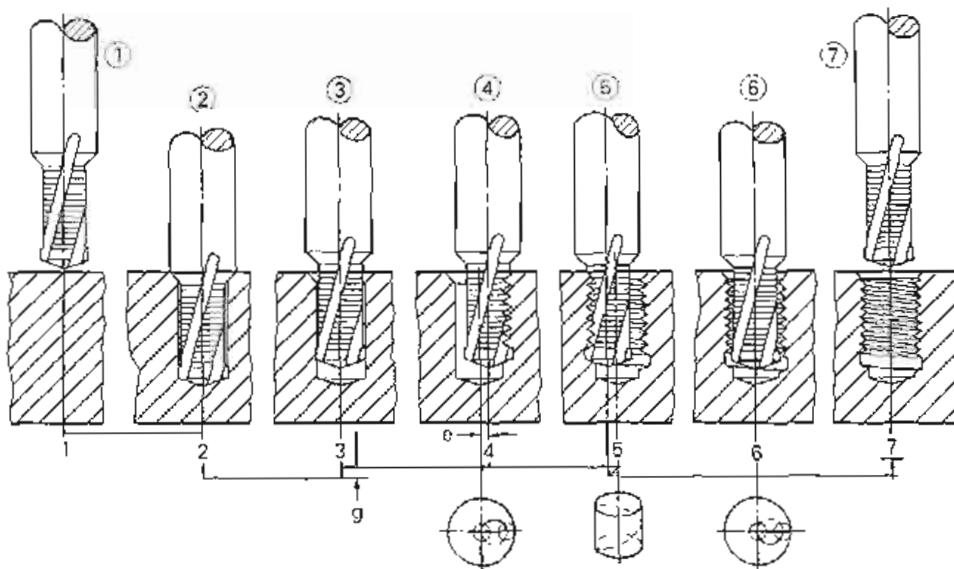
The process of high-speed thrilling (drilling plus threading) a hole includes (1) approach, (2) drill plus chamfer, (3) retract one thread pitch, (4) radially ramp to the major thread diameter, (5) thread-mill with helical interpolation, (6) return the tool to the centerline of the hole, and (7) retract from the finished hole. At 20,000 rpm, a hole can be thrilled in aluminum in less than two seconds. (*Fred Mason, American Machinist, November, 1988*)
